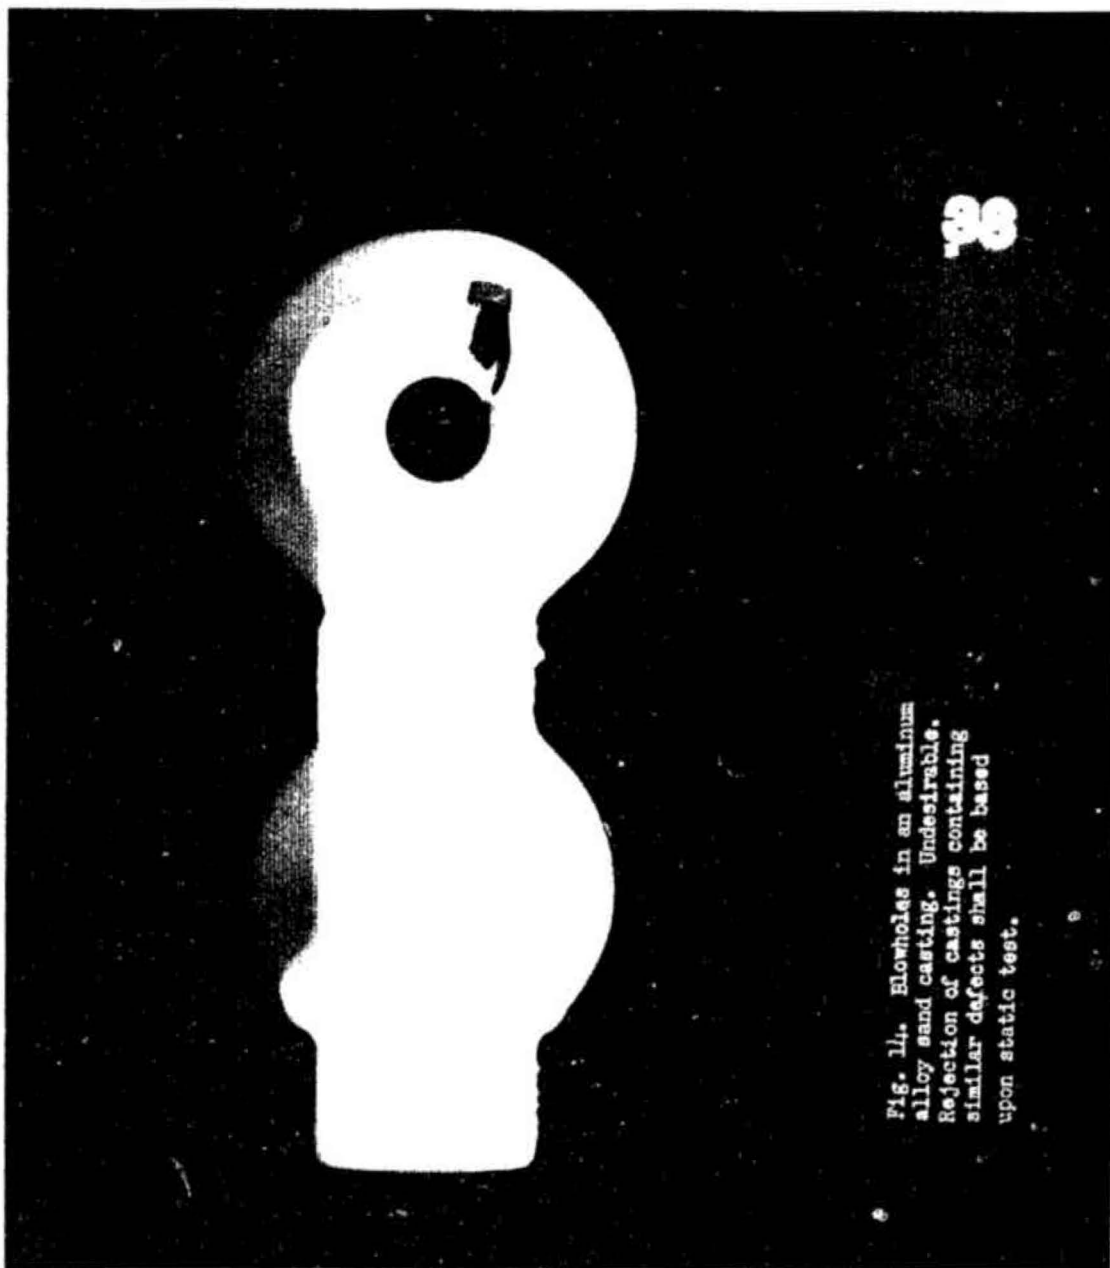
Blowholes in an aluminum alloy sand casting. Undesirable. Rejection of castings containing similar defects shall be based upon static test.
